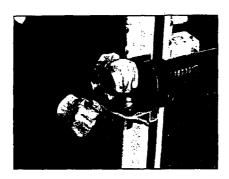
Removing MC Cutting Shoe with filled sampler tube held in Machine Vise.
